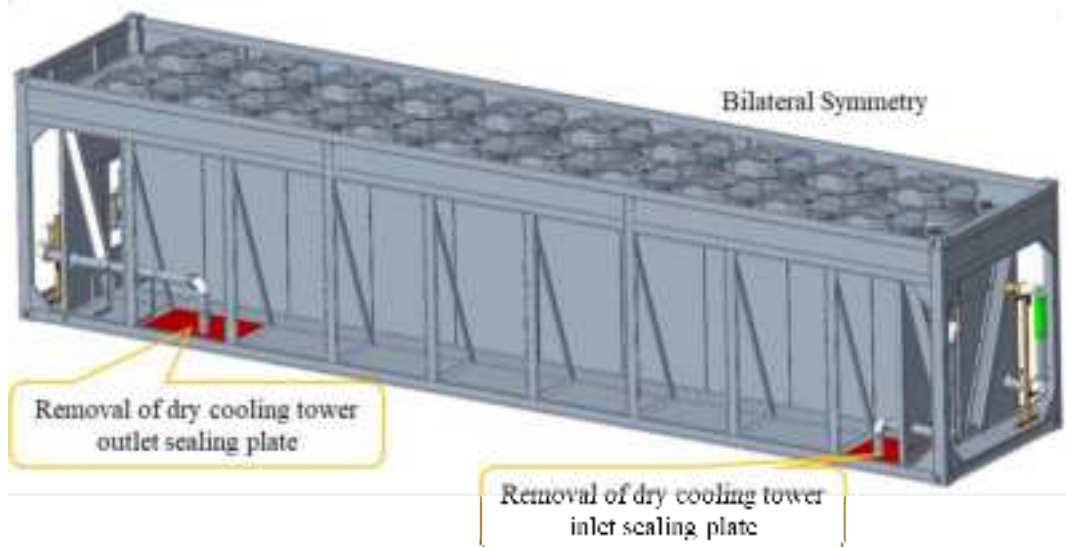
Schematic diagram of bottom inlet and outlet piping seal plate removal
